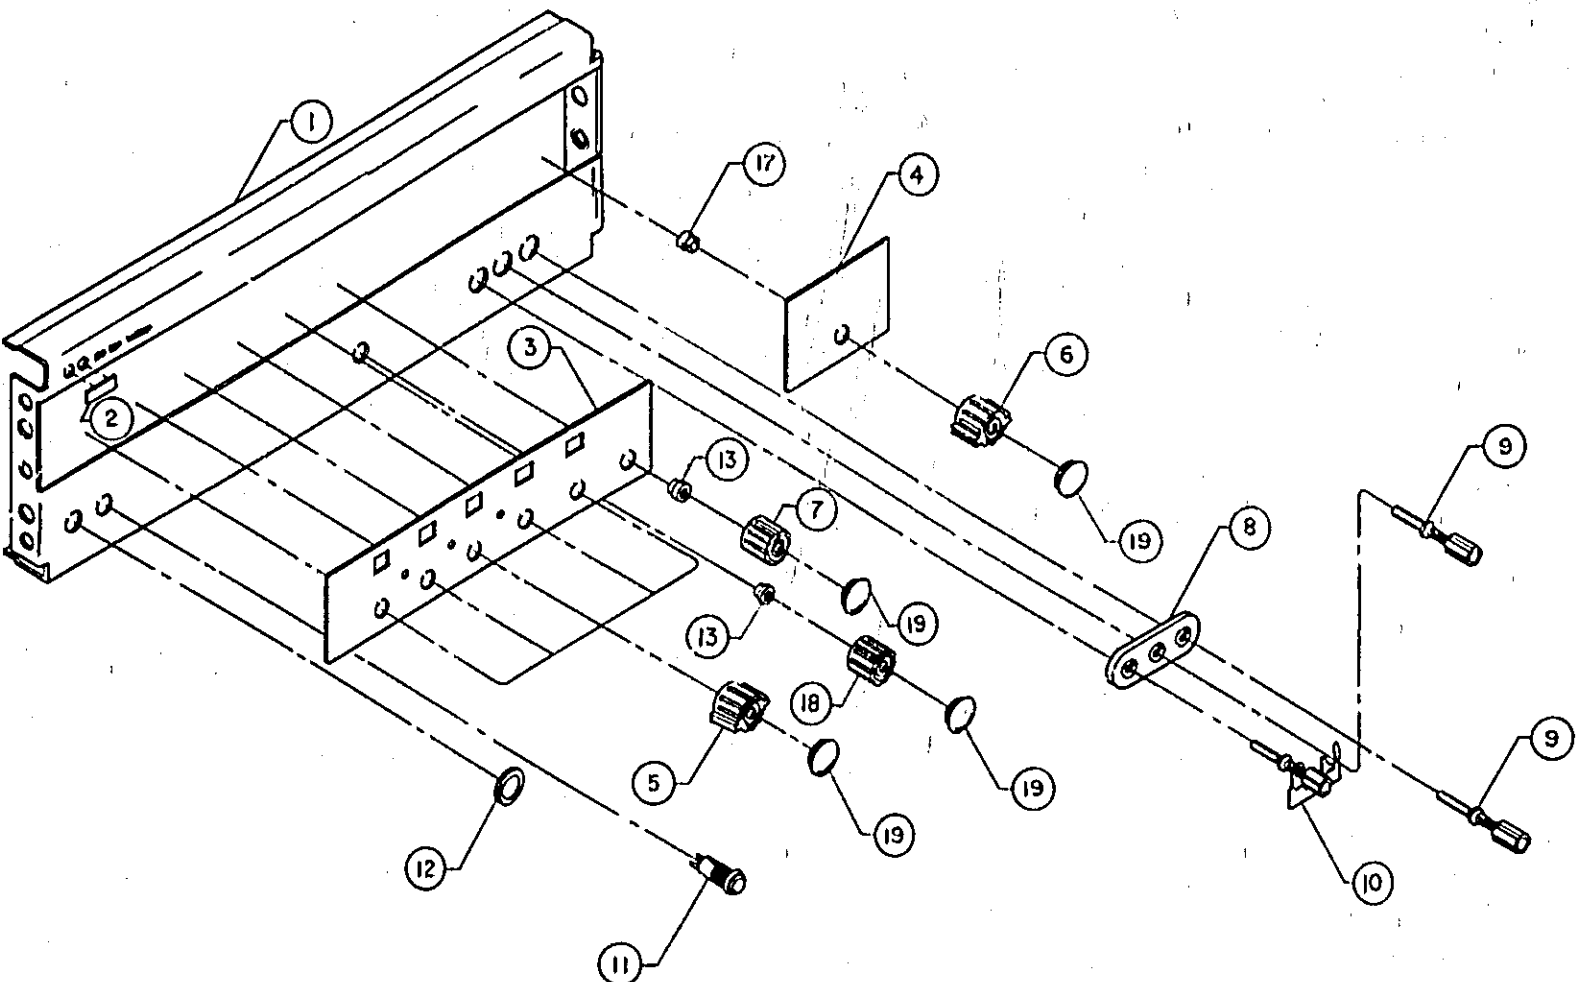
Exploded View of Front Panel Assembly (1) (Sheet 1 of 2)
